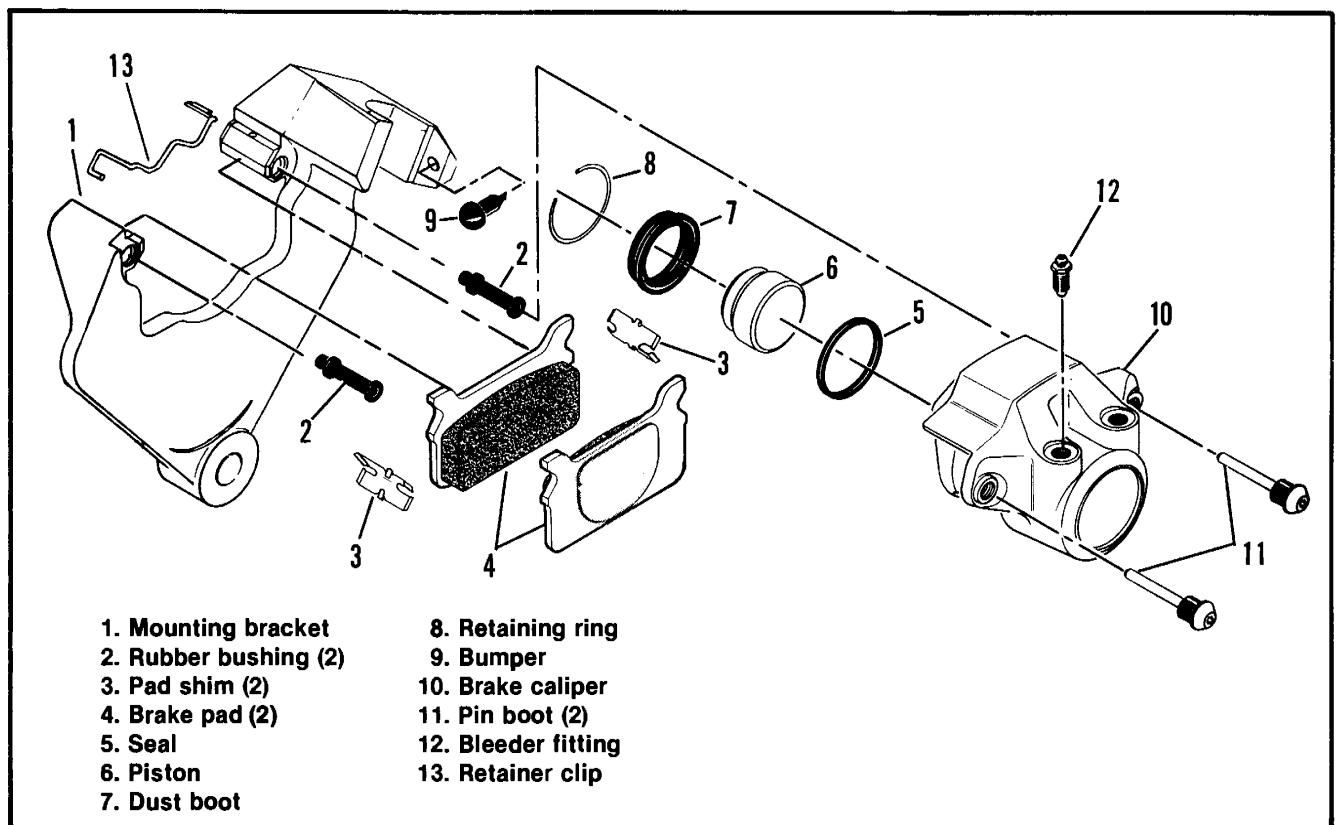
Rear Caliper — 1986 and later FLT Models
